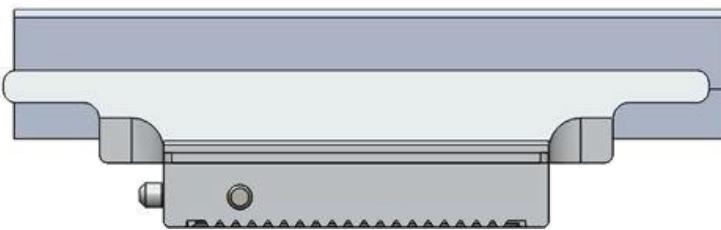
11.5-INCH LONG PART PUSHED INTO PLACE USING Y PUSH TOOL
